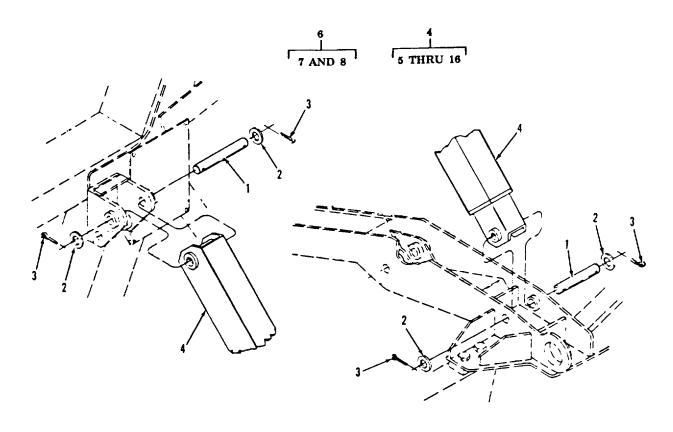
REAR ADAPTER, PLATFORM, AND UPPER AND LOWER ARM ASSEMBLIES
